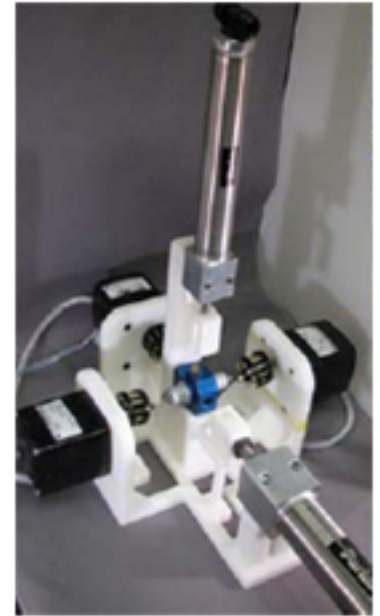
A test fixture that clamps to a liquid oxygen economizer valve
